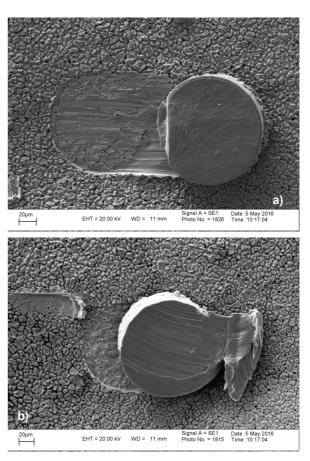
Shear test failure modes: (a) failure at the Cu-Ag welding interface; (b) bulk failure within Cu bump.
